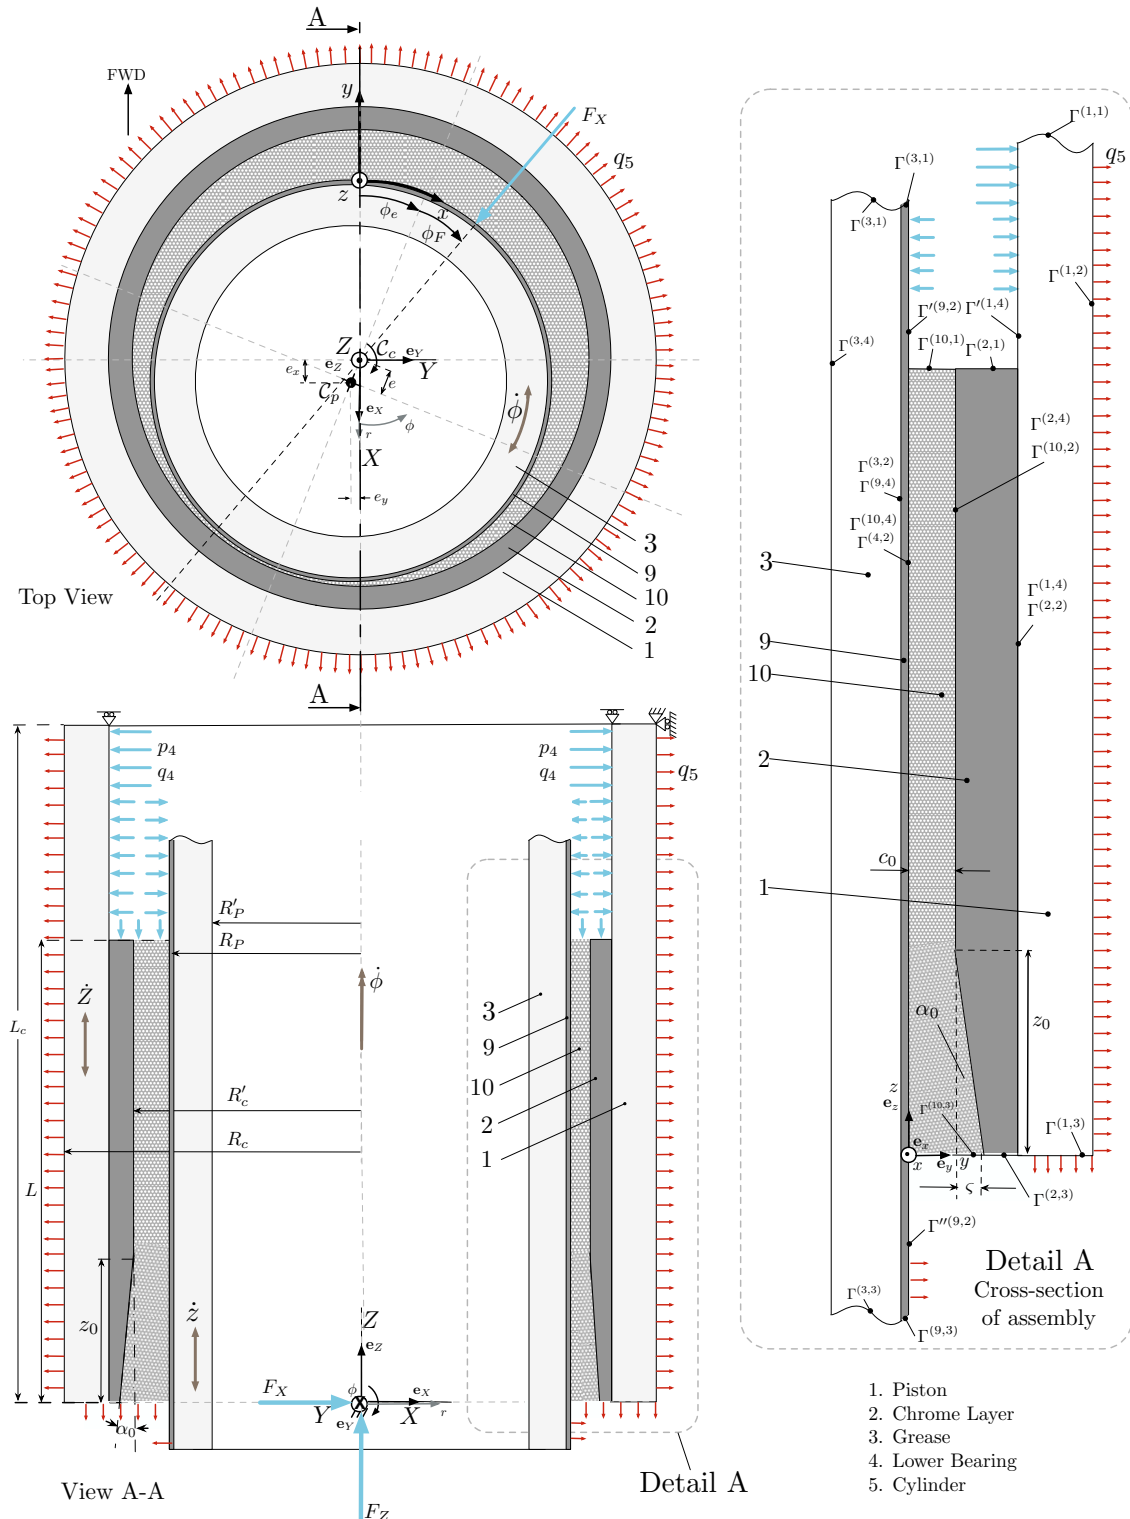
Model definition showing a top and cross-sectional view of the lower bearing assembly. The boundaries Γ are highlighted.
